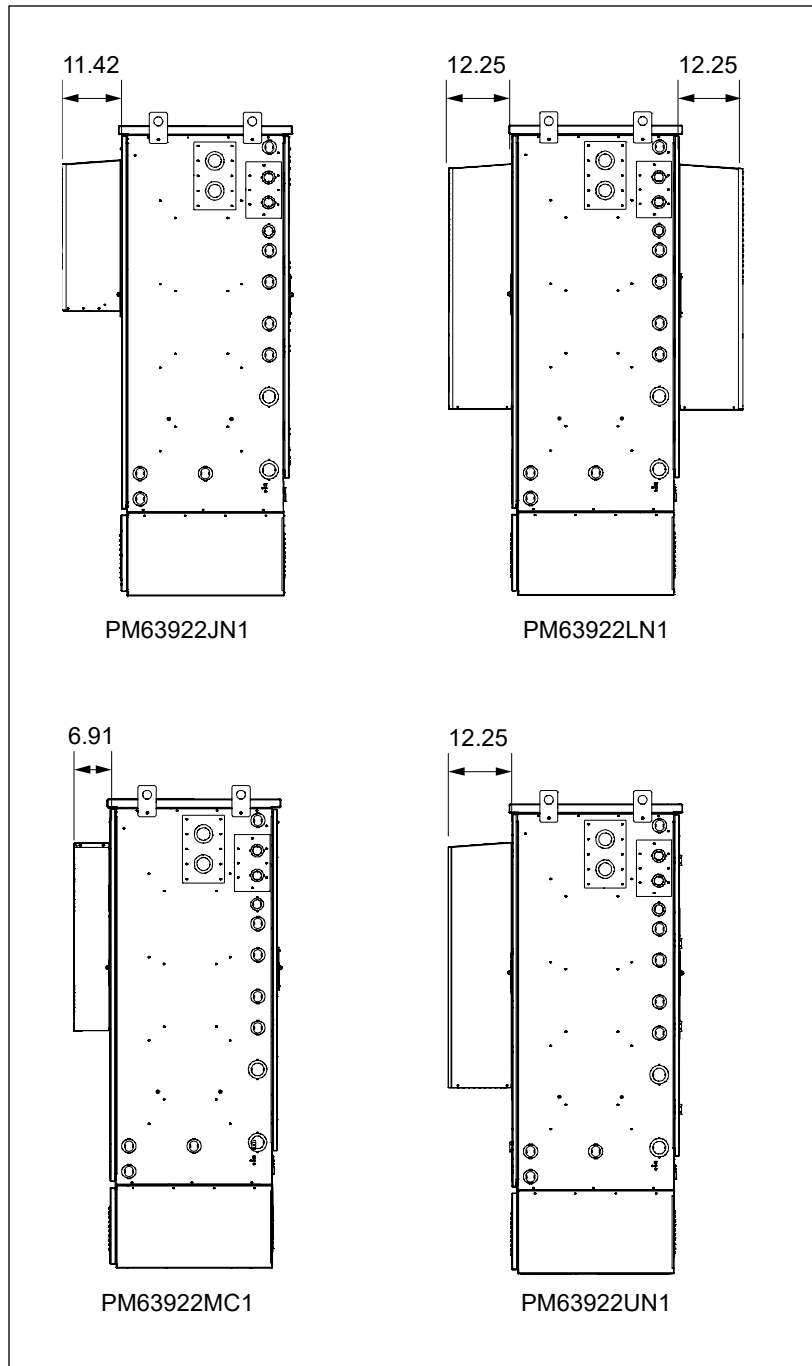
CUBE Thermal Equipment Dimensions (in inches)
